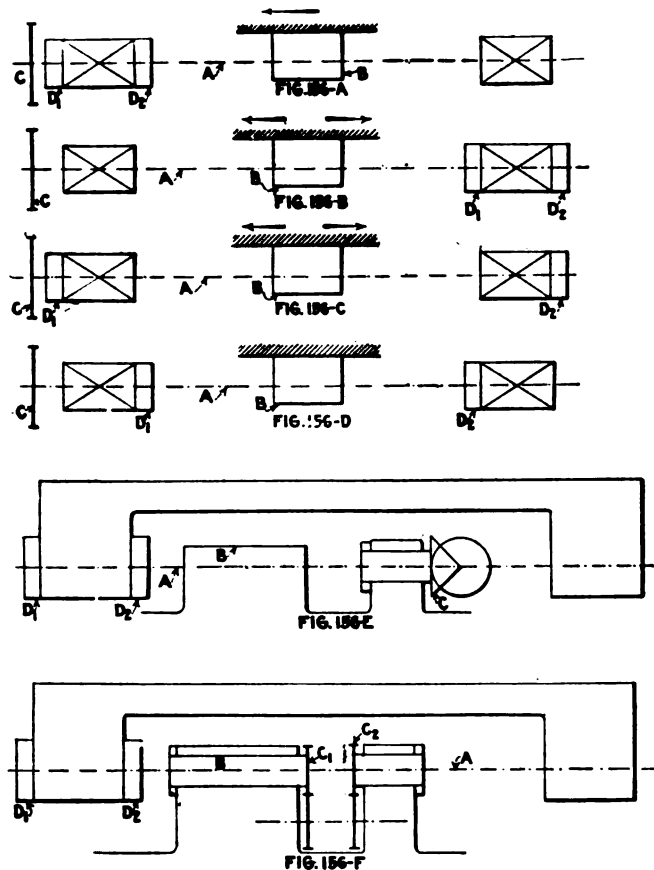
VARIOUS ARRANGEMENTS OF FEED SCREW PARTS
